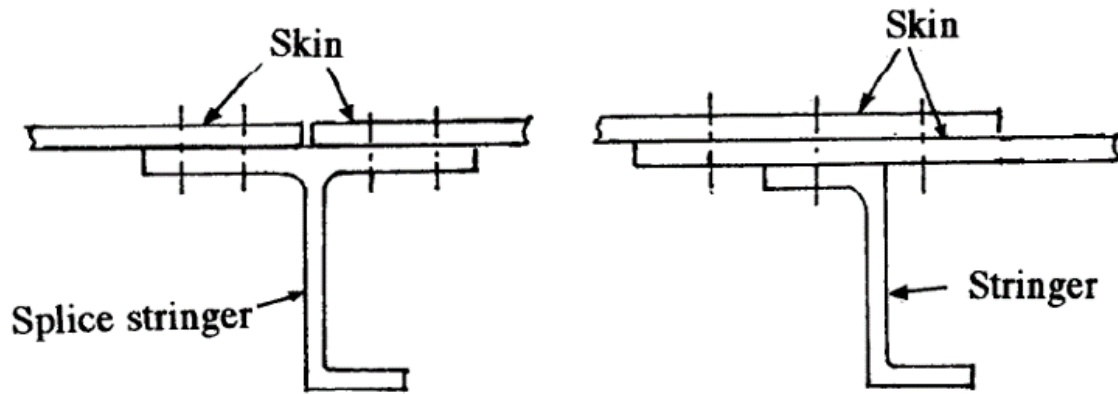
Joint of skin and stringer using rivets (Barbini, 2016).
